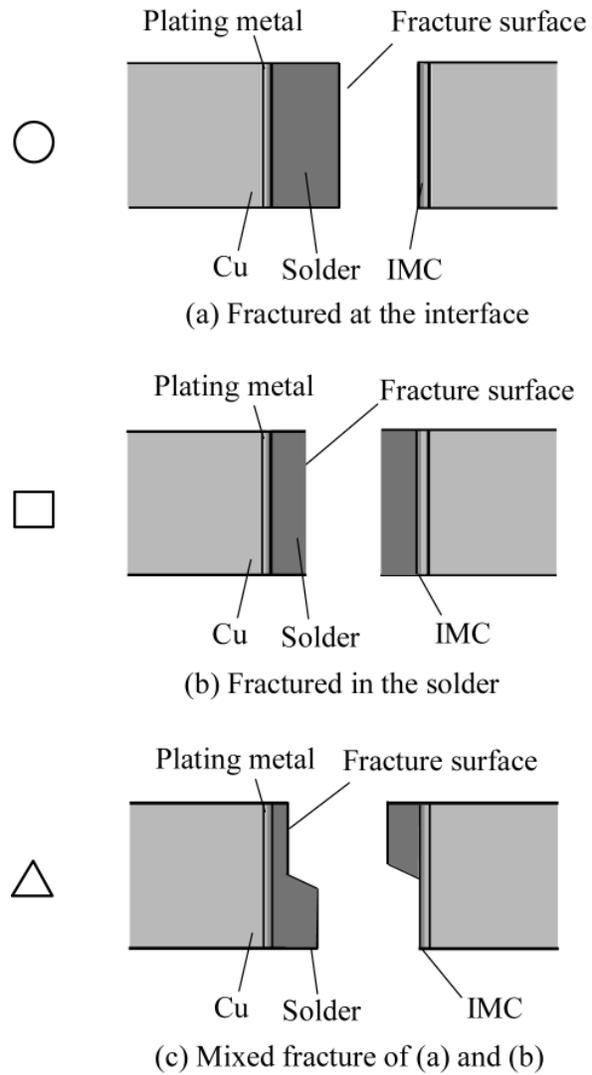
Fracture patterns of the failed specimen by the tensile testing.
